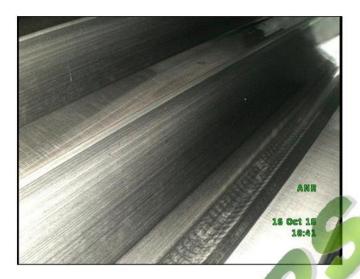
shows bearing position no. 10, the bearing of the high speed shaft at rotor side. The bearing shows no irregularities.
